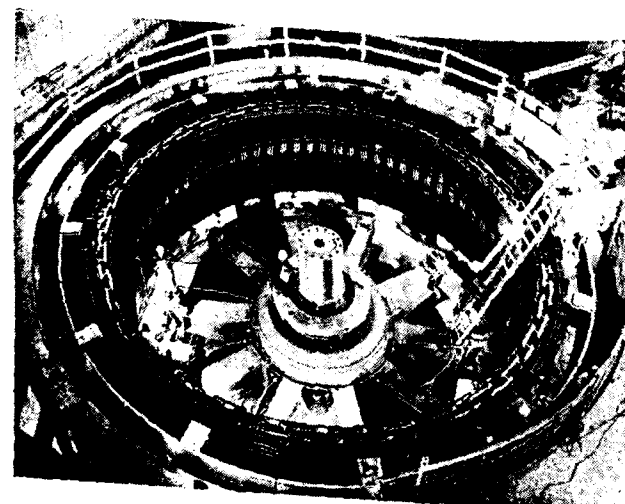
The stator bearing bracket, combined thrust and guide bearing and shaft ready to receive the rotor. At the end of the bearing-bracket arms the brake blocks can be seen. The latter are utilised, after having been fitted with brake pads, for both braking the rotating parts of the set and lifting these when inspecting, for example, the thrust bearing. (52178. Photographed by Ekholtz)
